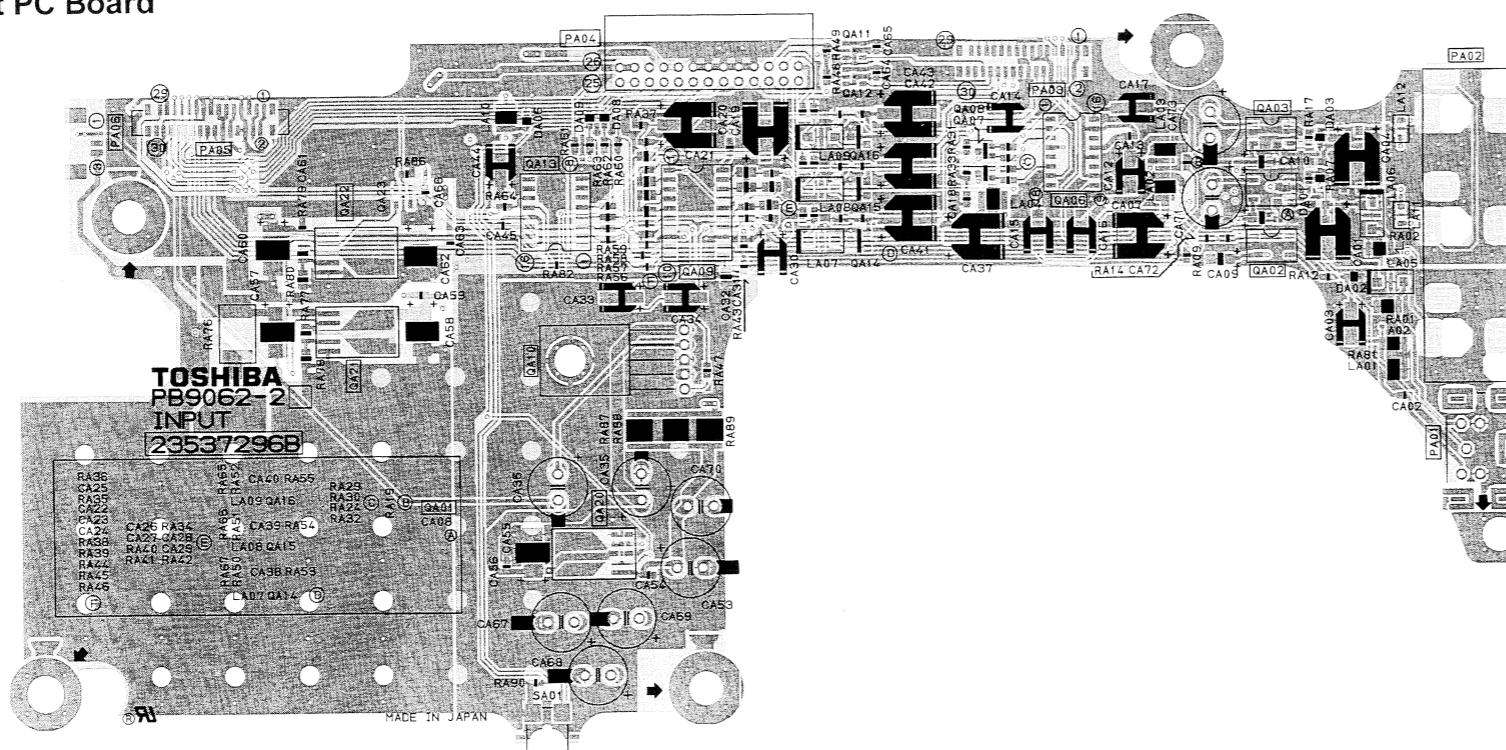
U0022 Input PC Board (Top Side)
